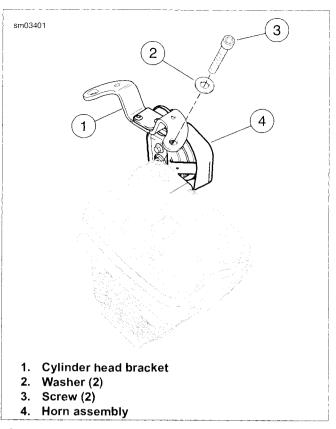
Horn and Cylinder Head Bracket: XL Models (side mounted horn)
